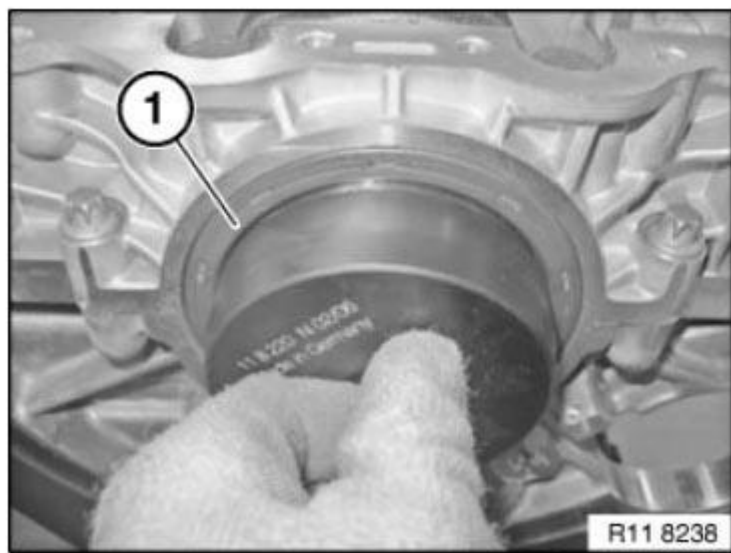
Moving Radial Shaft Seal Parallel Up Against Crankcase
